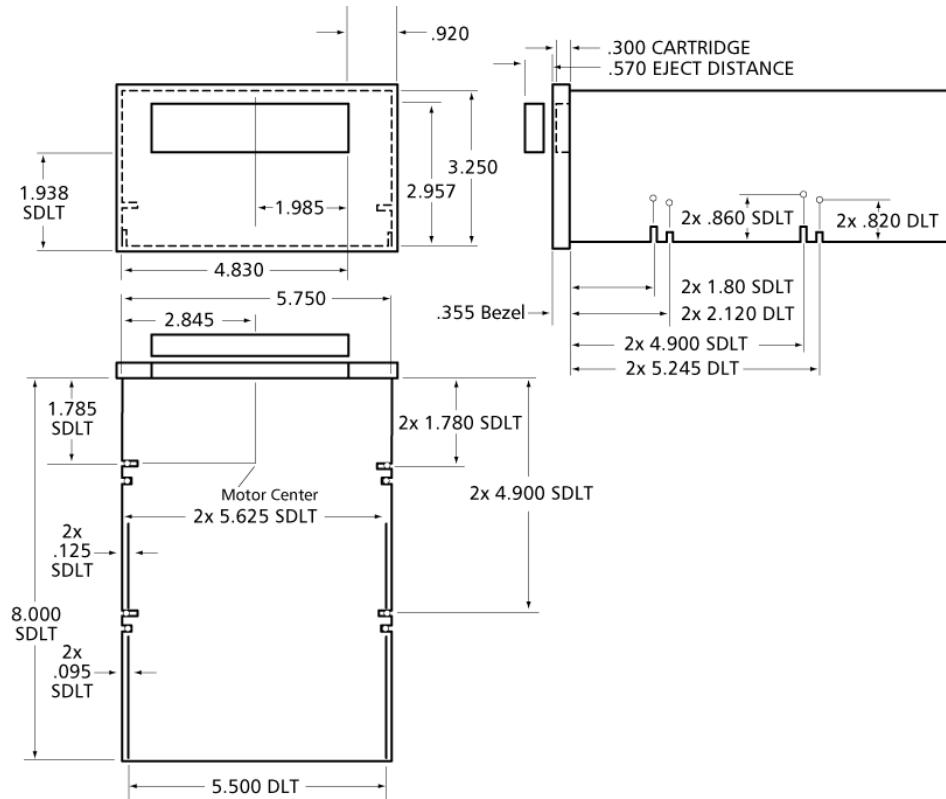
Internal Drive Mounting Locations – Side and Bottom Views
